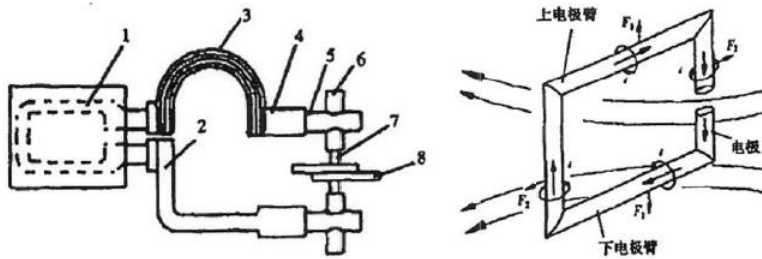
Schematic representation of the welding machine circuit to calculate Lorentz forces in a welding machine
